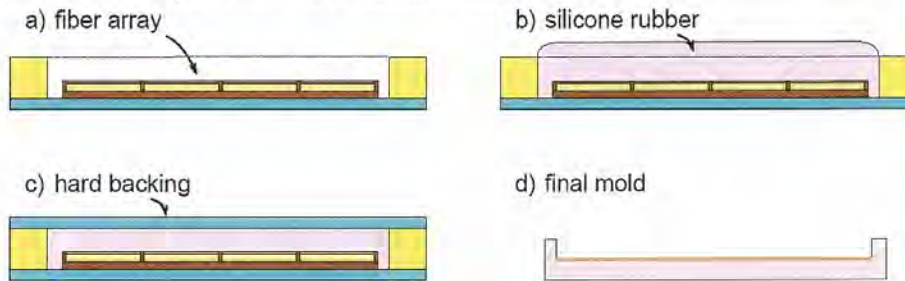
Mold-making, a) a window is placed around fibers, b) silicone rubber is poured, c) a rigid backing material flattens silicone rubber, d) mold is demolded and ready to be used.
